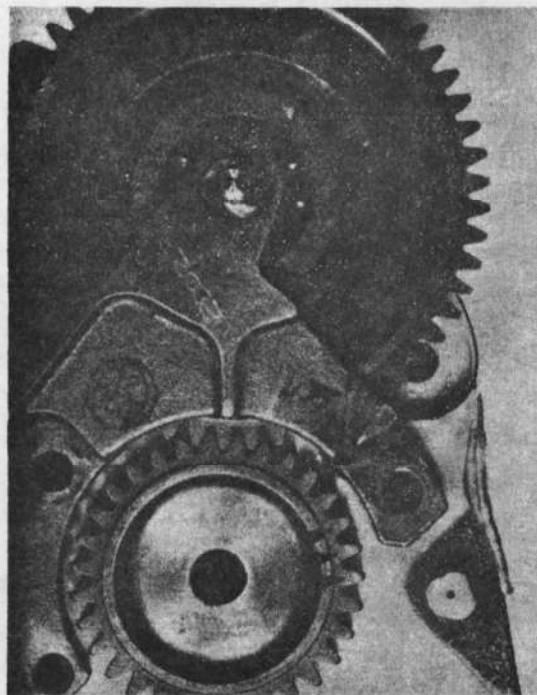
Imprint Marks on Left Torque Sensor Assembly
